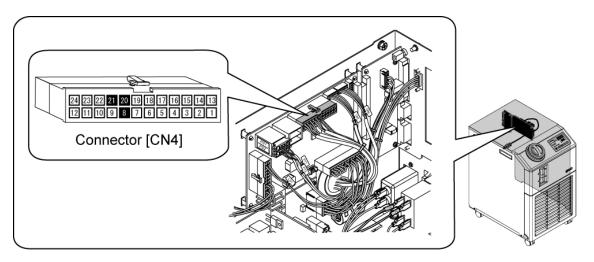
Check the connection of the circulating fluid pressure sensor
